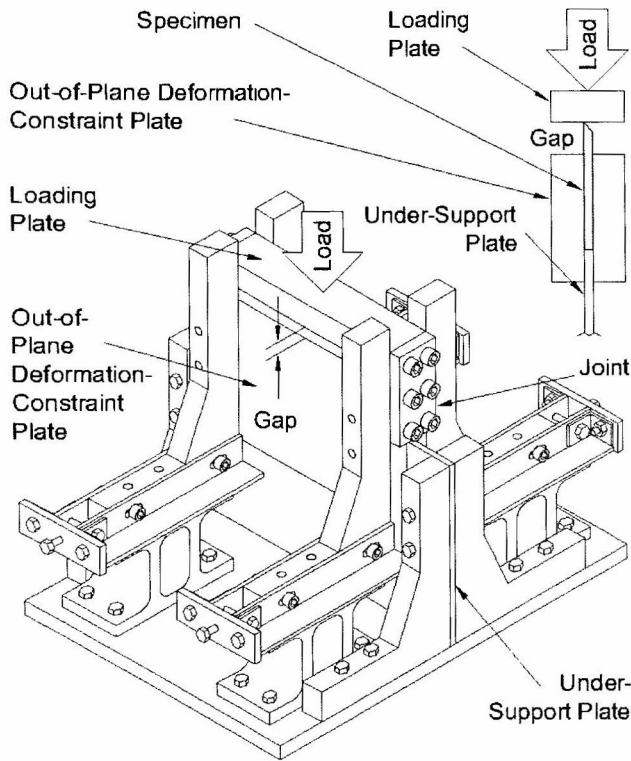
Representation of the test fixture developed at the University of Washington for crushing flat coupon specimens<sup>39</sup>.
